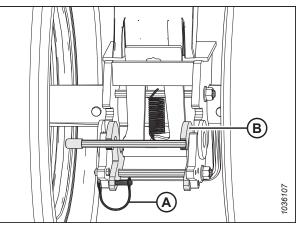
Left Transport Wheels – Rotation Lock Latch Engaged
